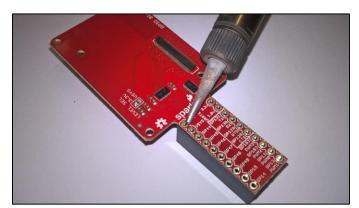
Applying hot soldering iron tip to GPIO board and pin contact point
